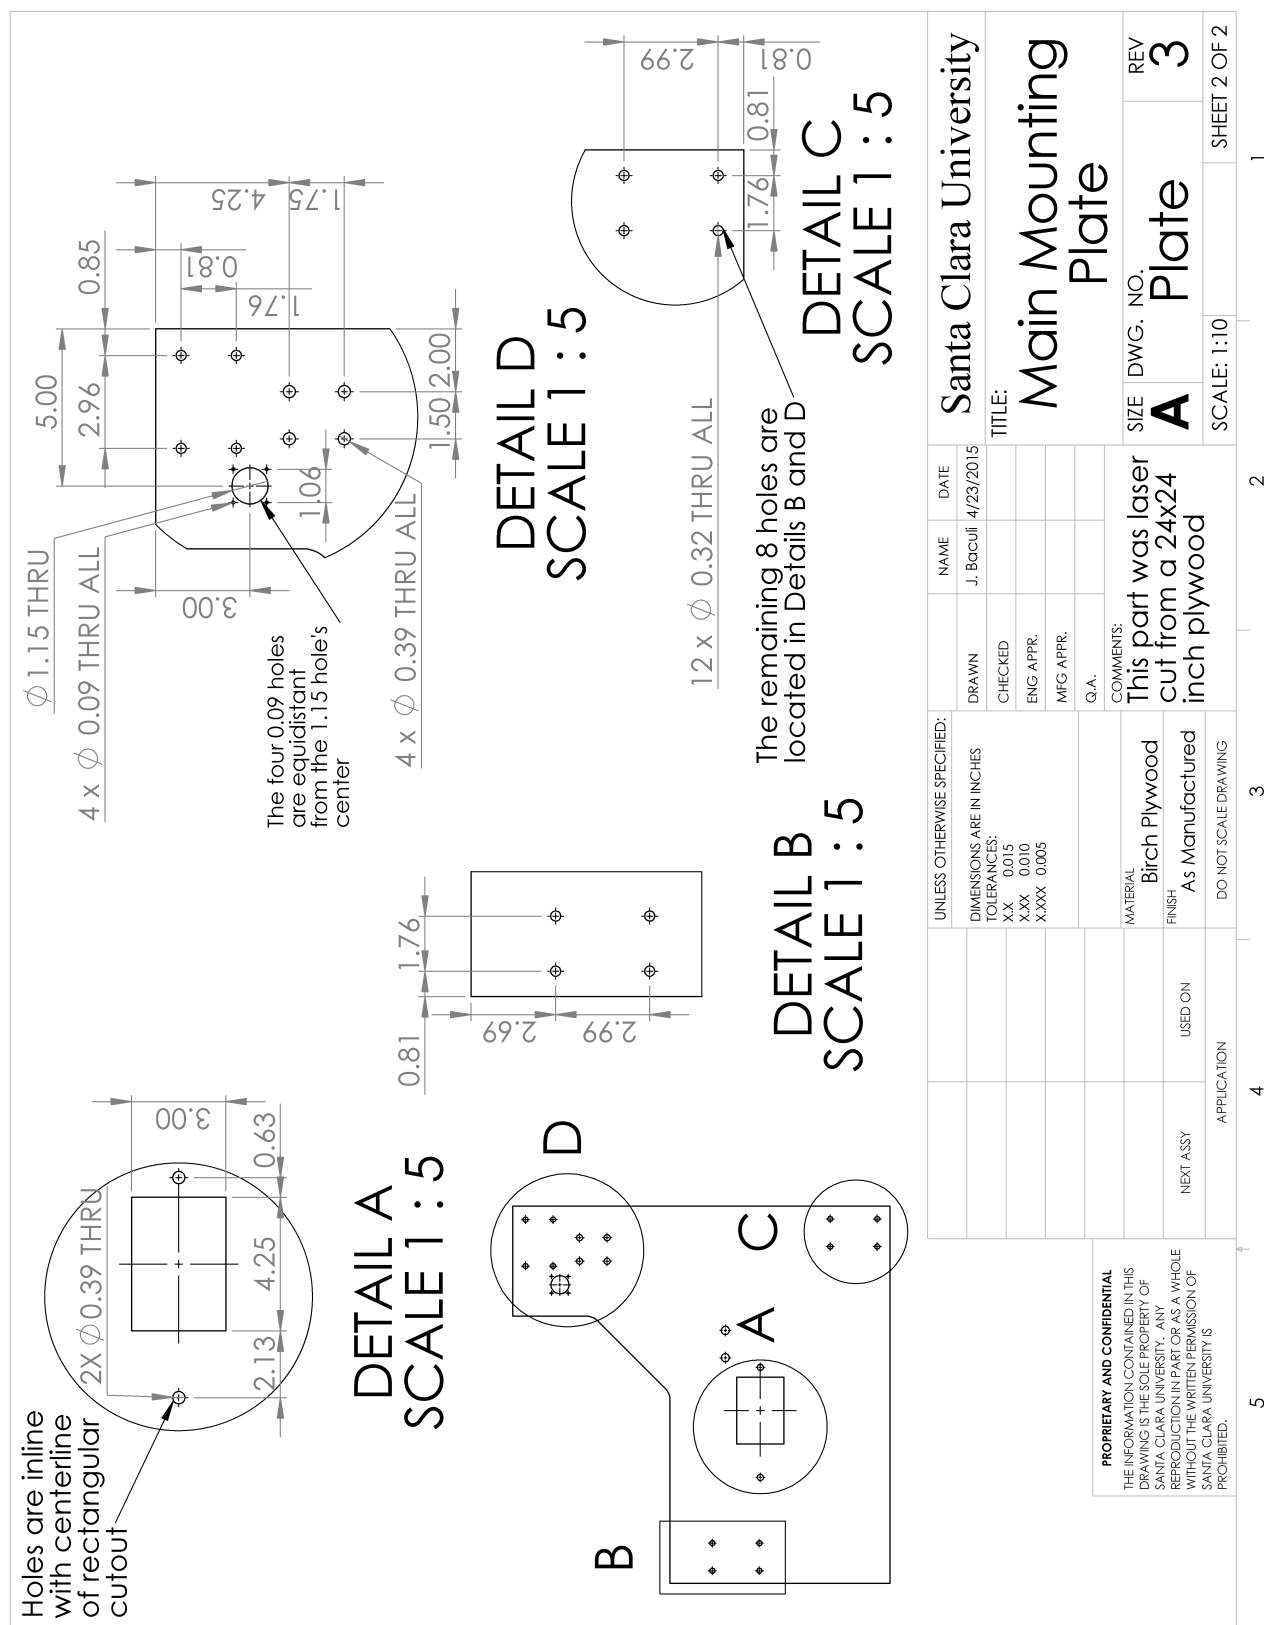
Mounting plate that contains the cutting head, sensor arm assembly, caster wheels, and linear actuator arm. This sheet shows the detailed locations of the caster wheel holes, cutting head, and sensor arm assembly.
